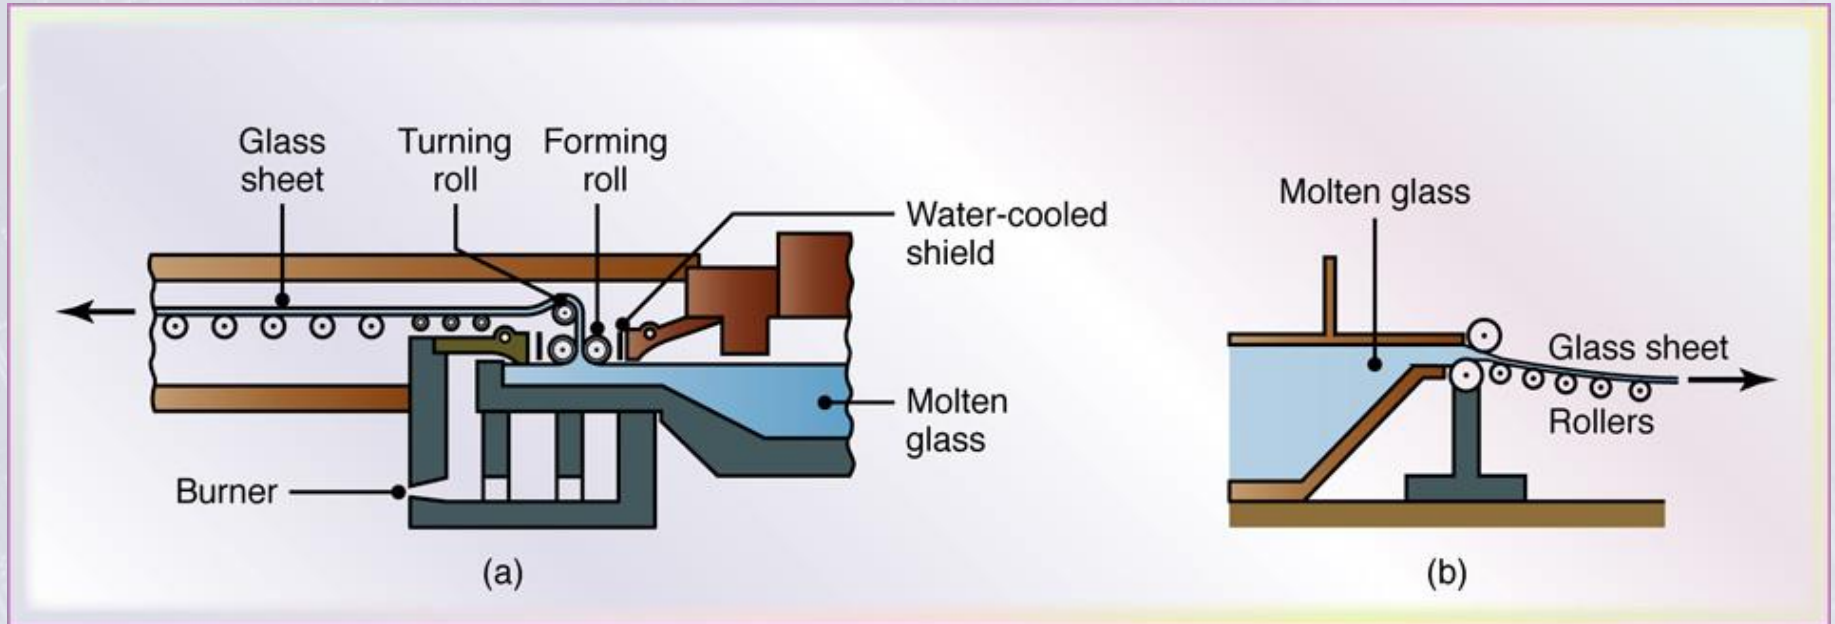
(a) Drawing process for drawing sheet glass from a molten bath. (b) Rolling process. *Source:* After W. D. Kingery.
